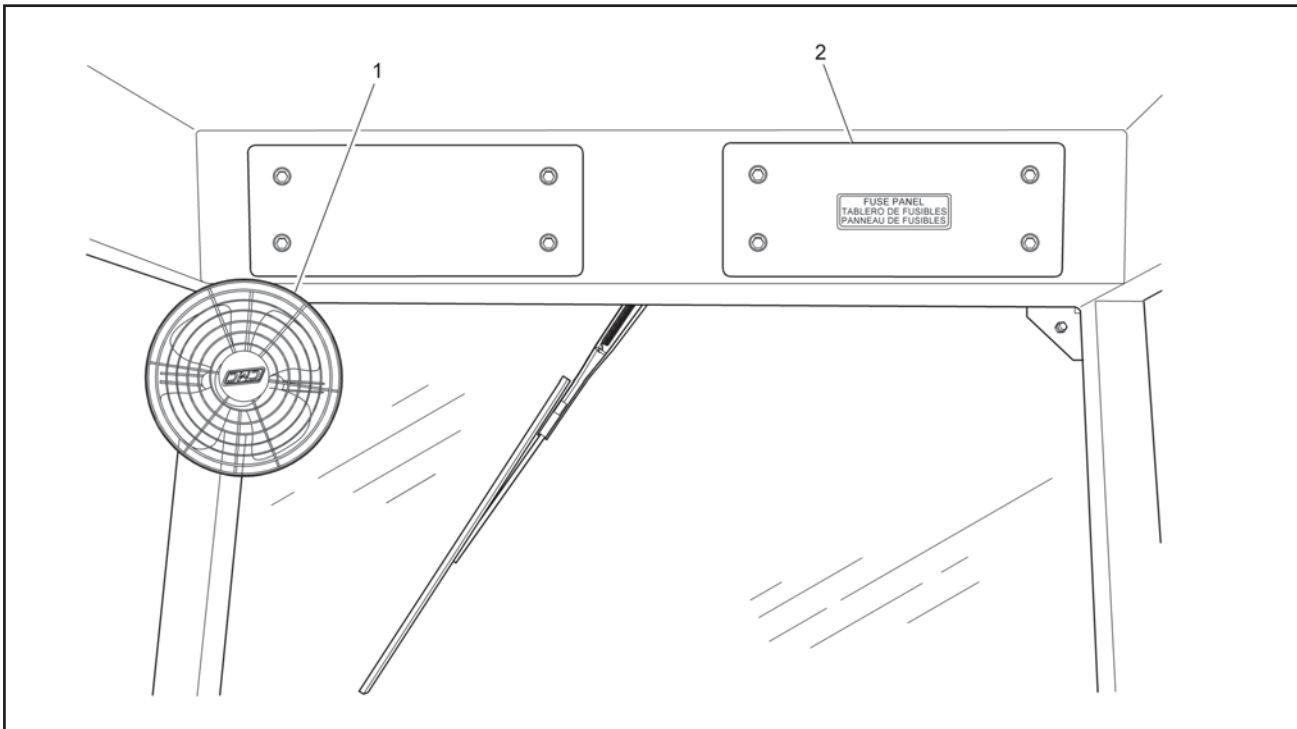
DEFROSTER FAN & ACCESSORY FUSE PANEL
